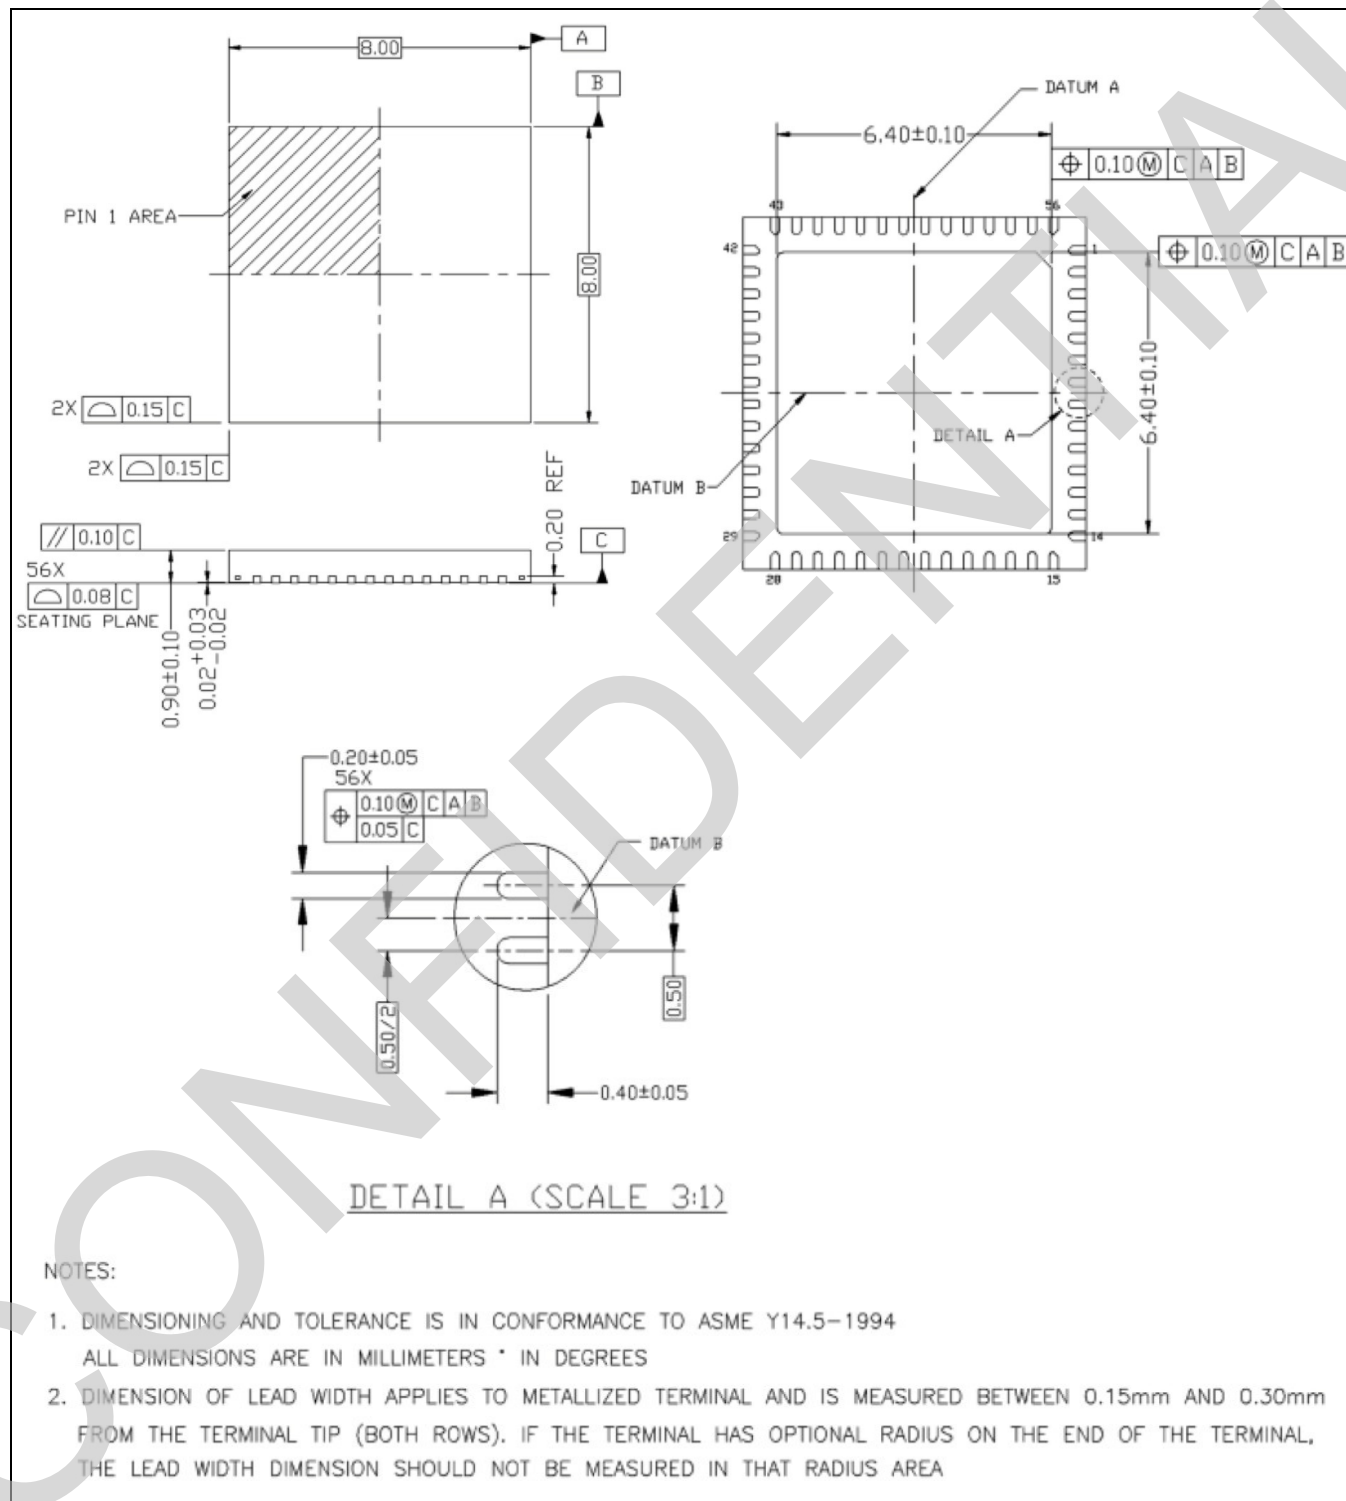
Le9662 (56-Pin QFN) Package Drawing
